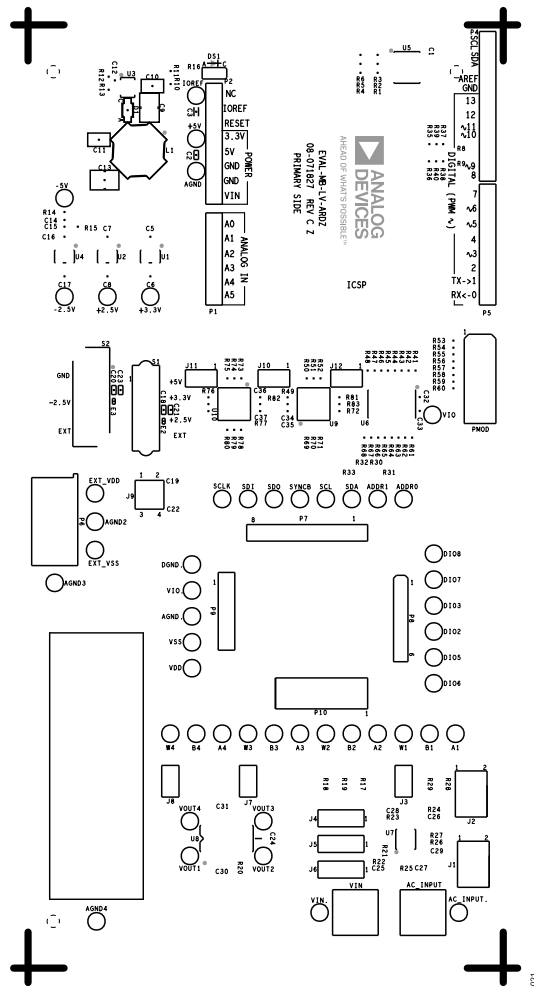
EVAL-MB-LV-ARDZ Board Layout Solder Mask Primary
